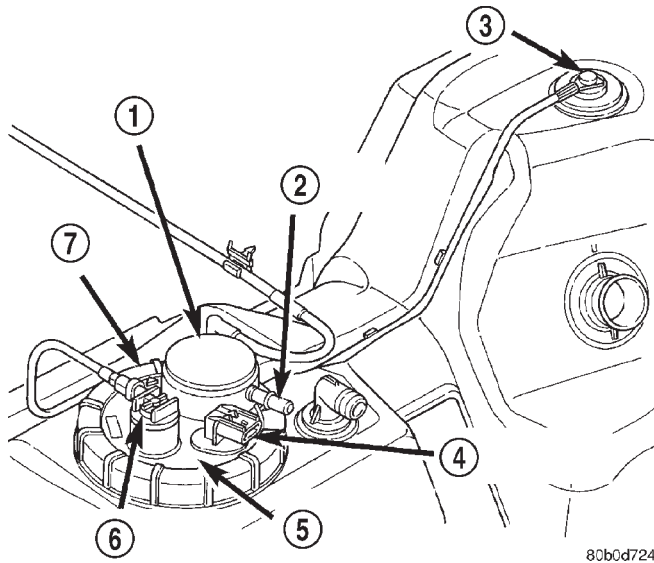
Fuel Pump Module—Gas Engine With 26 or 34 Gallon Tank
